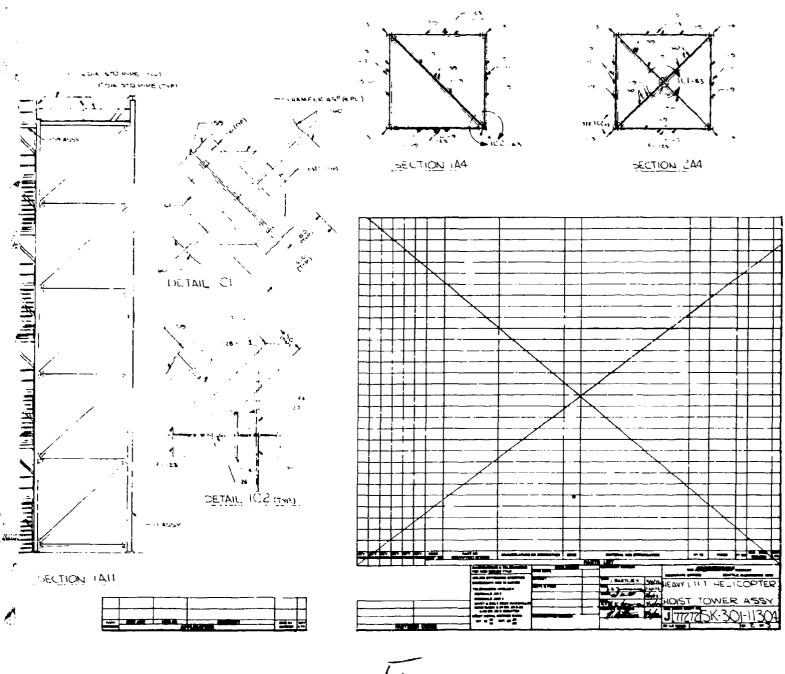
HLH Hoist Tower Assembly (Sheet 2).
